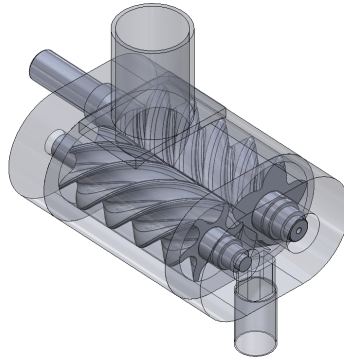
Assembly of a twin-screw compressor or expander machine.
